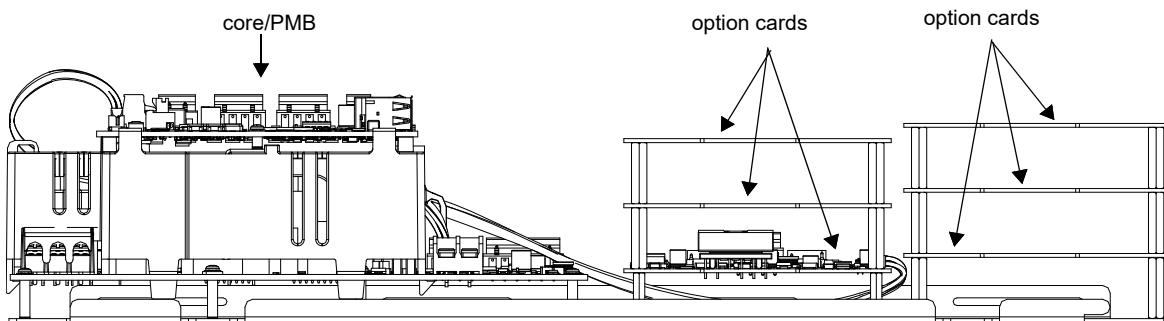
N16 Equipment Mounting Options (Shown with Stacked Option Cards)
